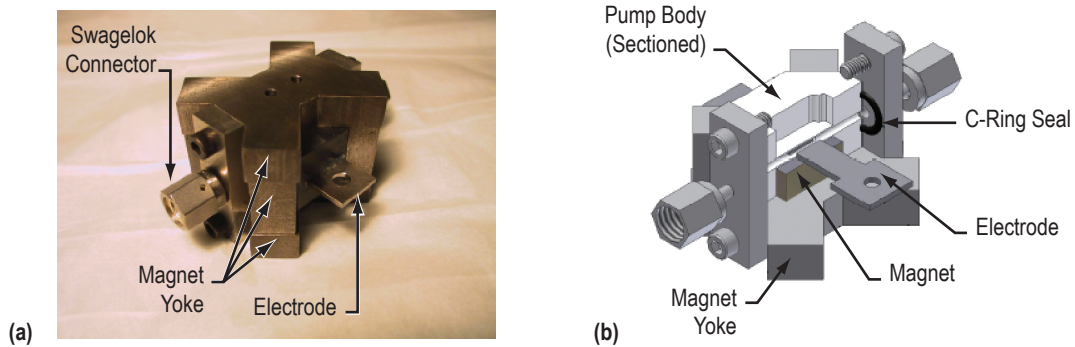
Electromagnetic pump: (a) Photograph and (b) CAD drawing of interior.
